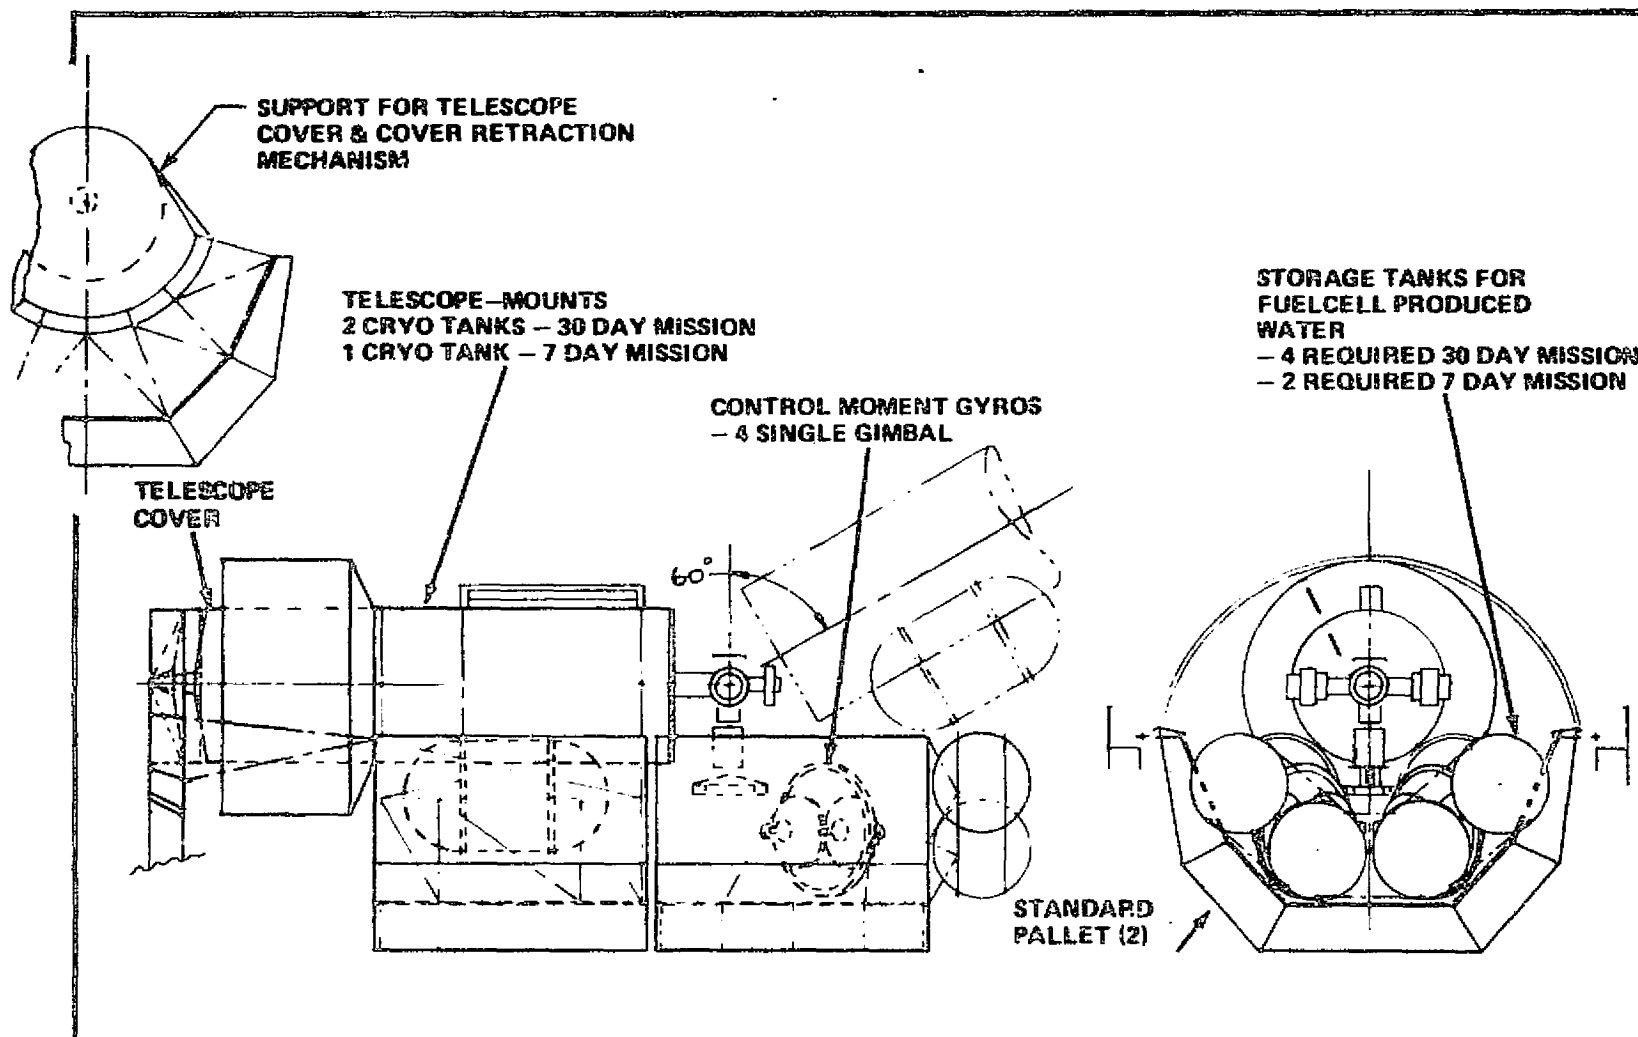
SIRTf Payload Bay Equipment Arrangement
